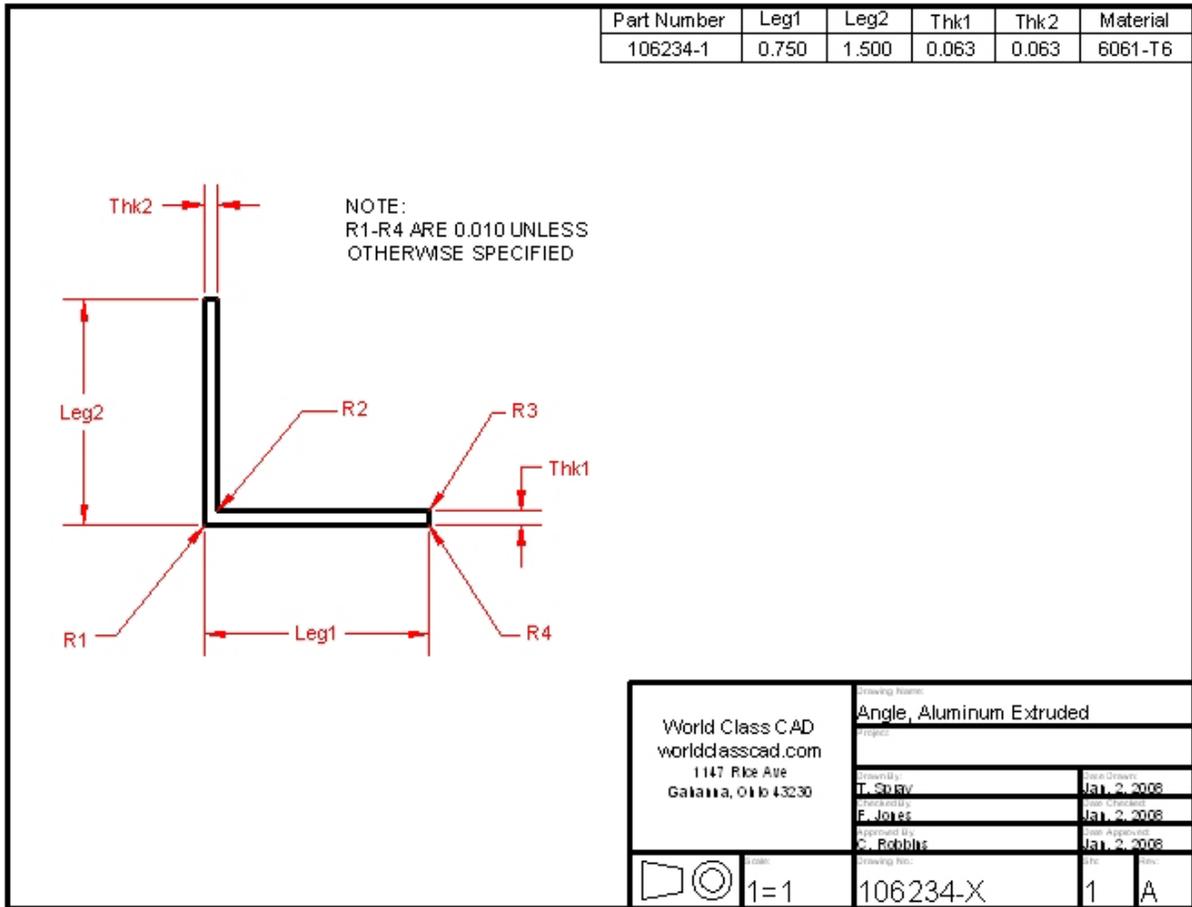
Table Drawing for the Aluminum Extruded Angle
